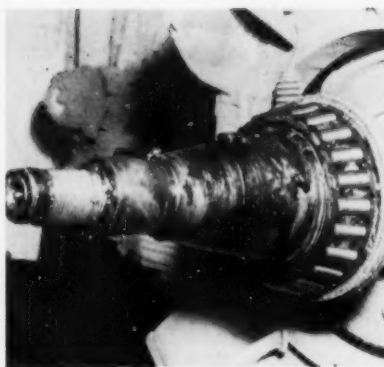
B—Spindle and Inner Bearing of Heavy Duty Truck Front Wheel After 20,000 Miles Using Grease D.
